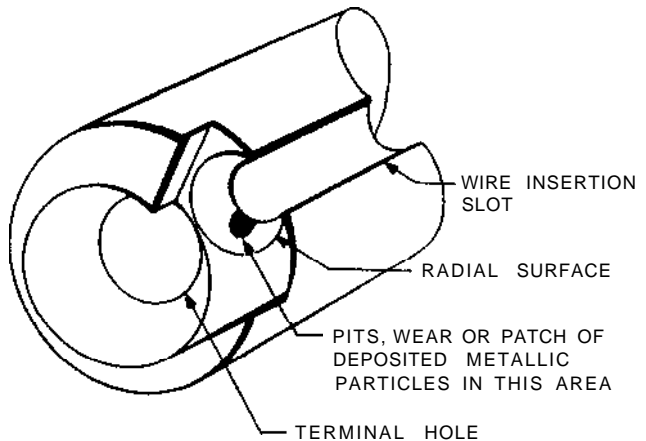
Outer End of Wrapping Bit—Conditions Which May Occur on Radial Surface
